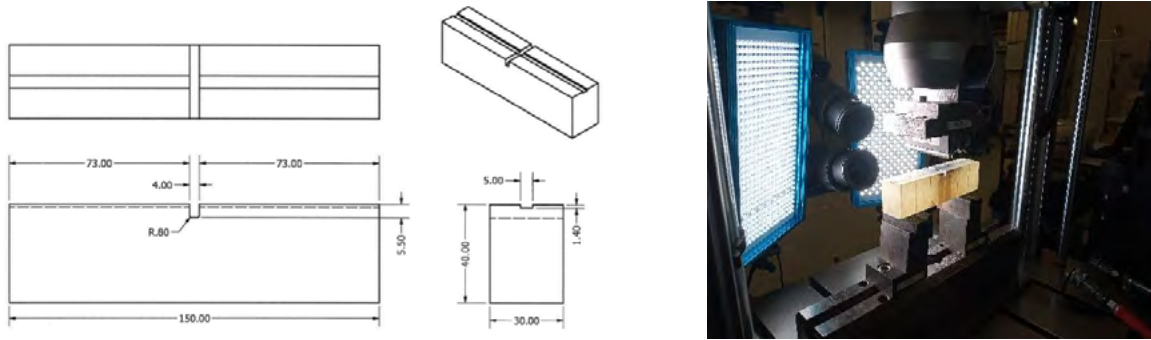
a) PMMA cradle dimensions, b) Testing and DIC set up
